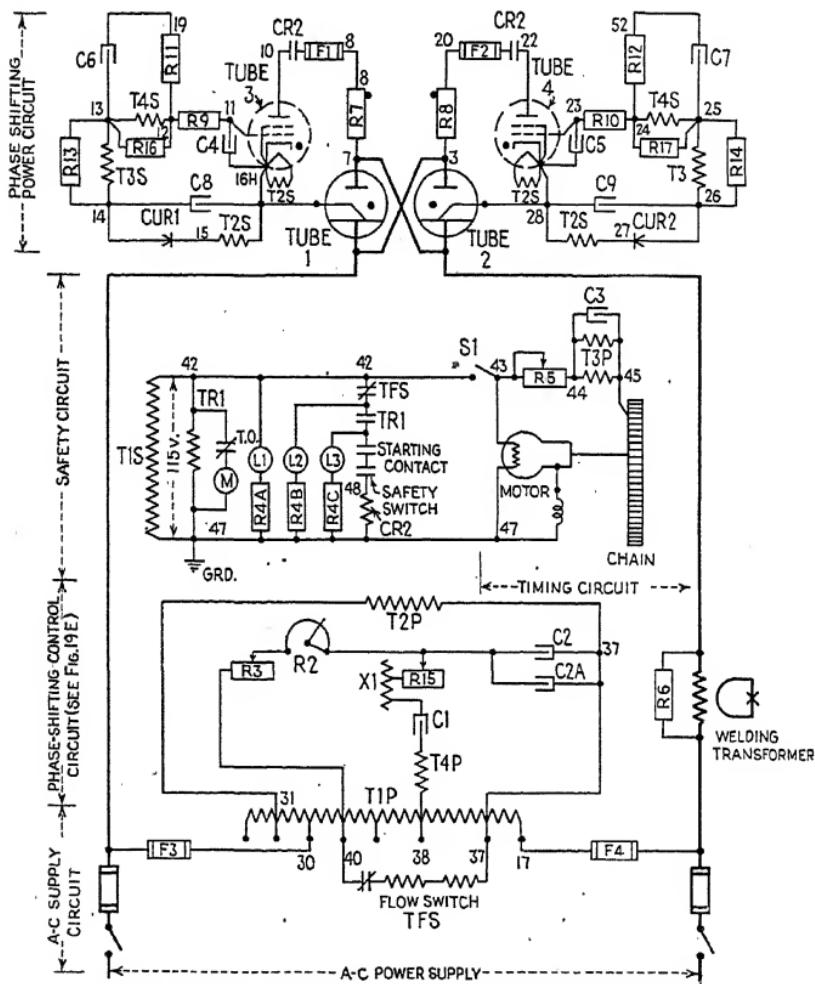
C.—Elementary diagram of CR7503-B102 seam-welding control.
